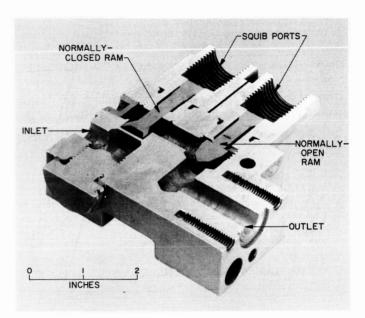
Unfired, explosively actuated propellant valve, sectioned view
